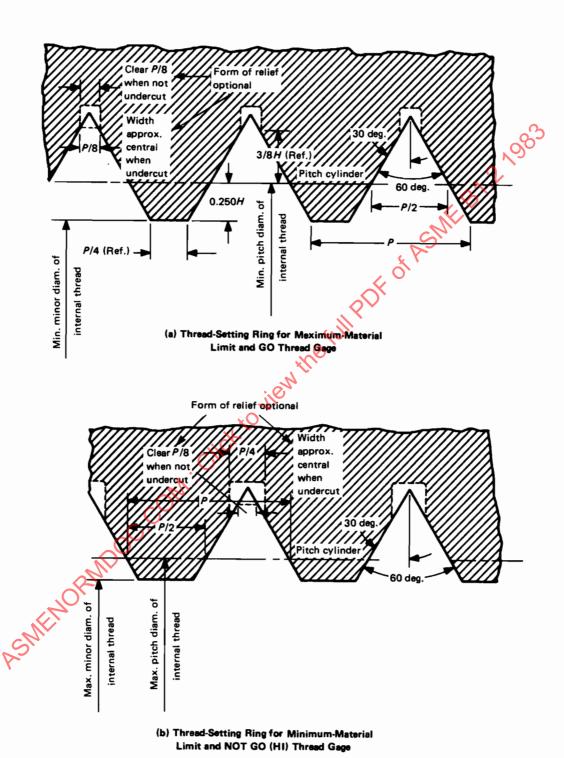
THREAD FORM OF SOLID THREAD-SETTING RING GAGES
